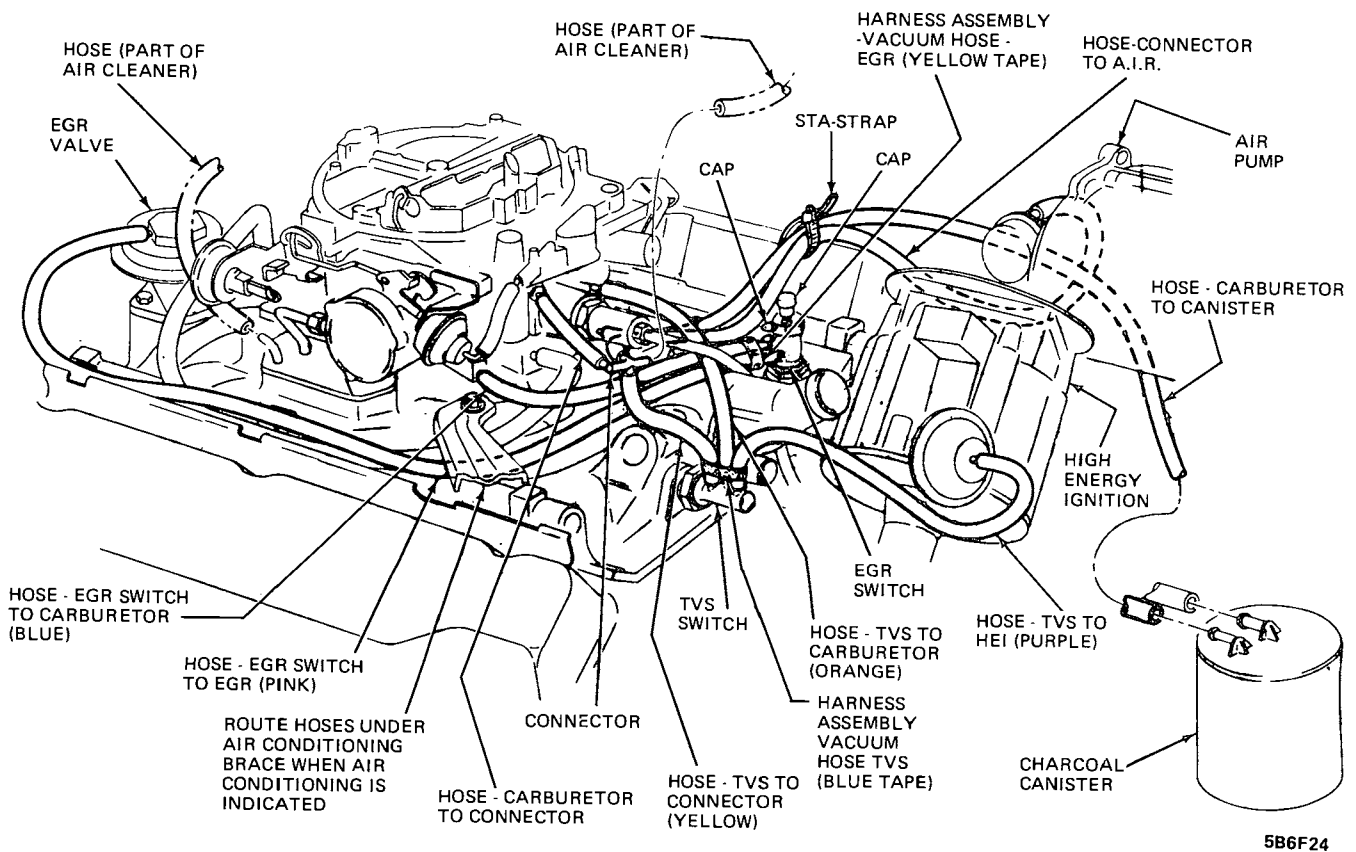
F-34 - 350 4 Bbl. Engine with A.I.R. less EFE Valve
